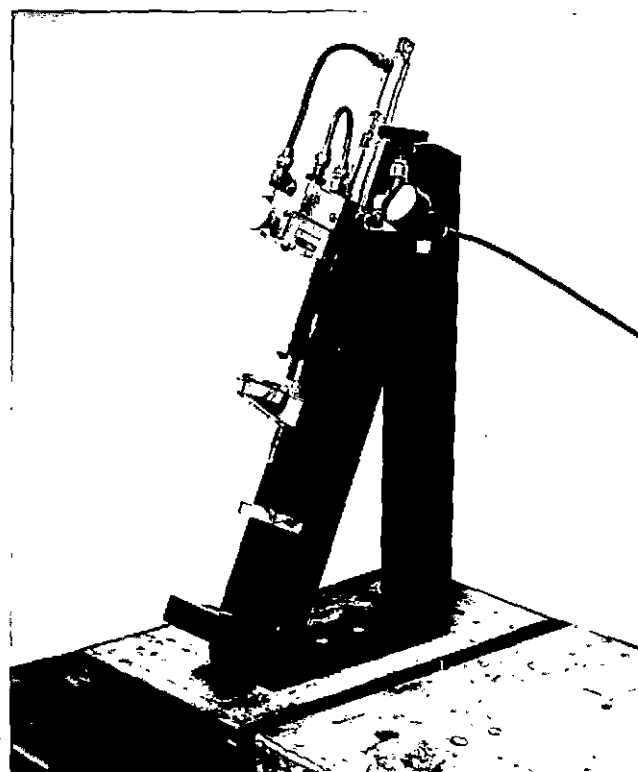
, (3375209). Injector Plunger Sticking Tool
